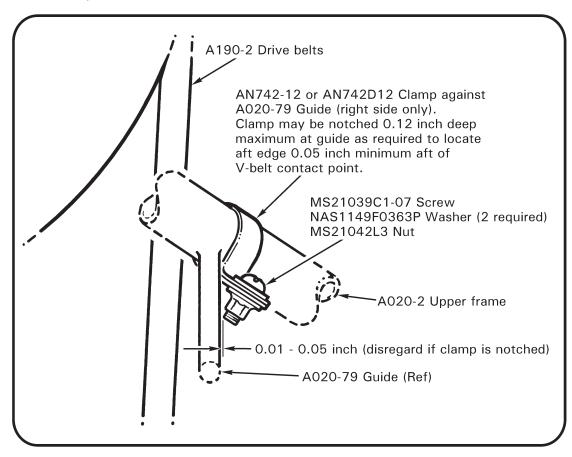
C UPPER FRAME PROTECTIVE CLAMP INSTALLATION (View looking forward)
